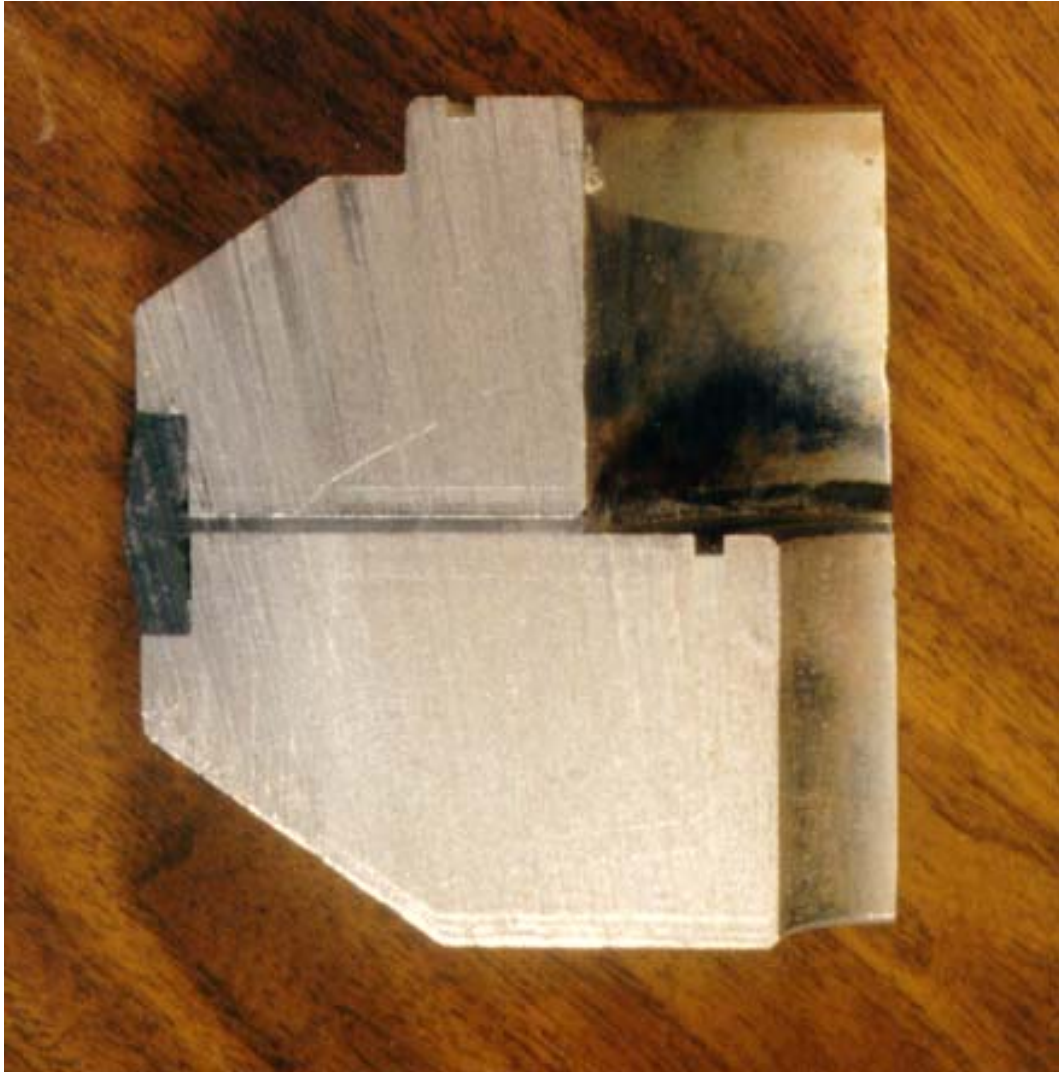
Cross-Section of a 2.5 mm Specimen
